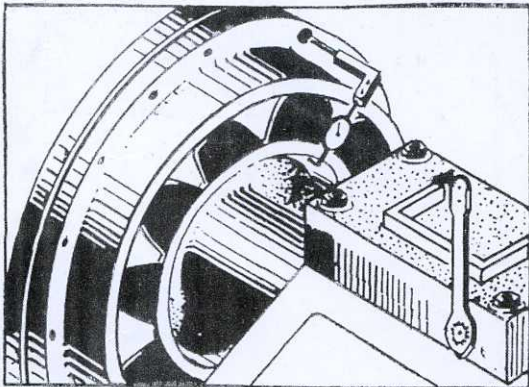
Correcting the Concentricity between Gearbox and Flywheel
